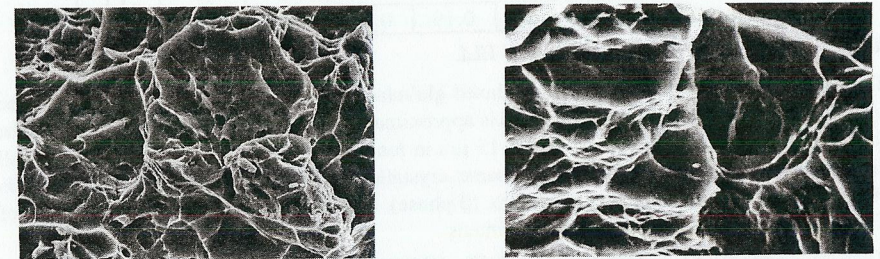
Fracture surface of tensile test-specimens at 300K (a) and 50K (b).
